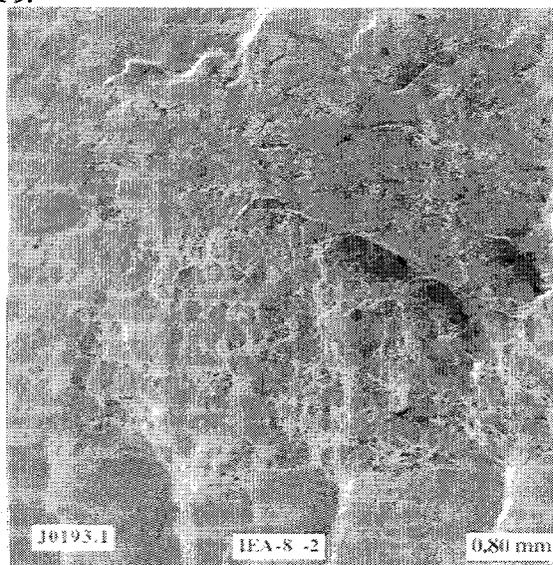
Fracture Surface of Specimen IEA-8 Showing the Fatigue Surface at the Bottom.
